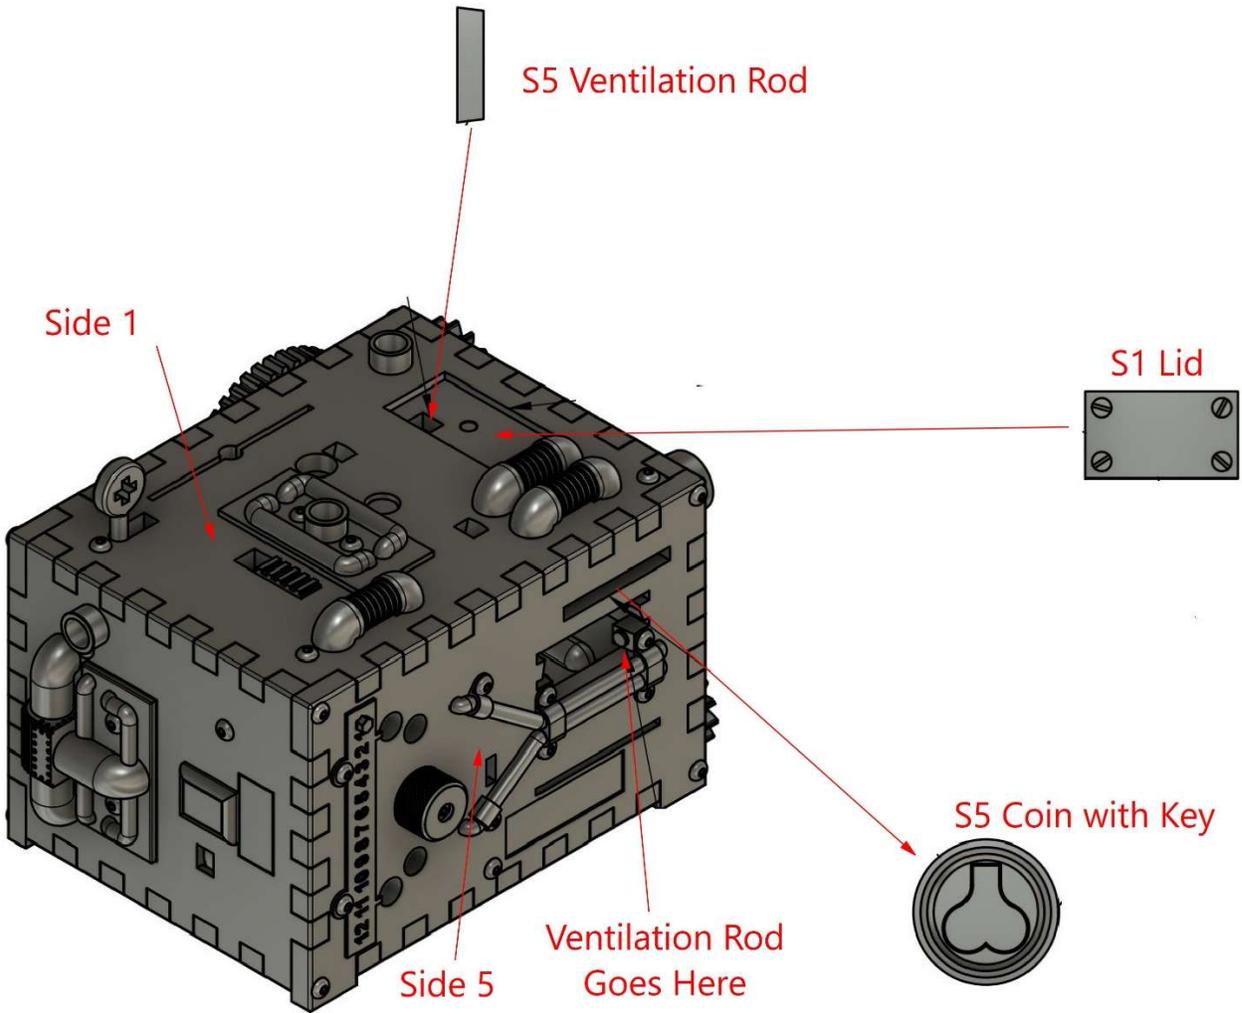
Three Sides of my Steam Machine Puzzle Box
